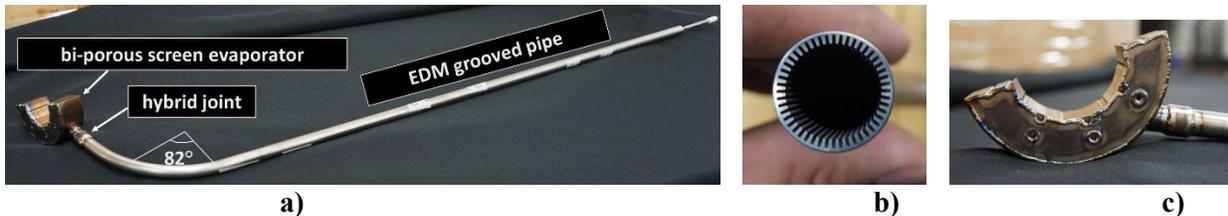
a) Titanium water heat pipe with bi-porous screen evaporator and hybrid wick for the rest of the pipe. b) Grooved wick manufactured by electrical discharge machining (EDM). c) Evaporator section of the heat pipe that has a semi-circular shape to be mounted on the cold end of the Stirling converter.
